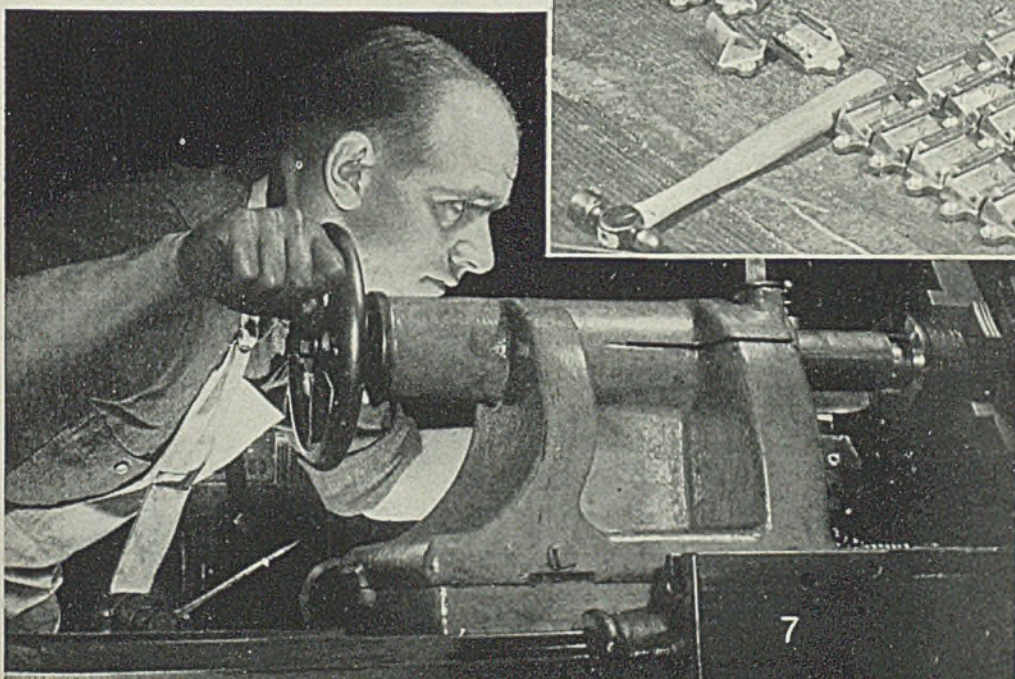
No—he's not drawing a bead on an enemy ship, but he's hitting at the Axis just the same. Formerly a WPA timekeeper, this employe also produces small parts for America's war machine
